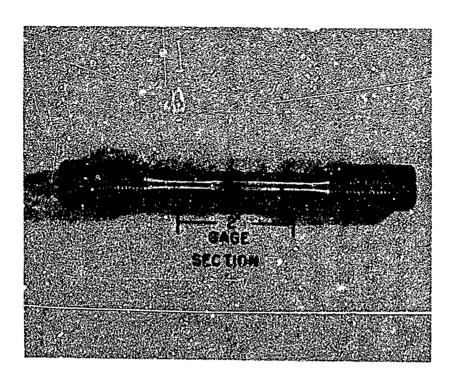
SMOOTH CAST TEST BAR SPECIMEN
